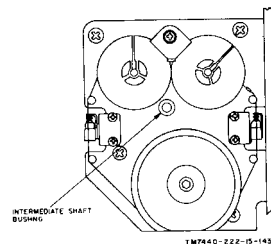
Ribbon/print wheel mechanism, lubrication point.
